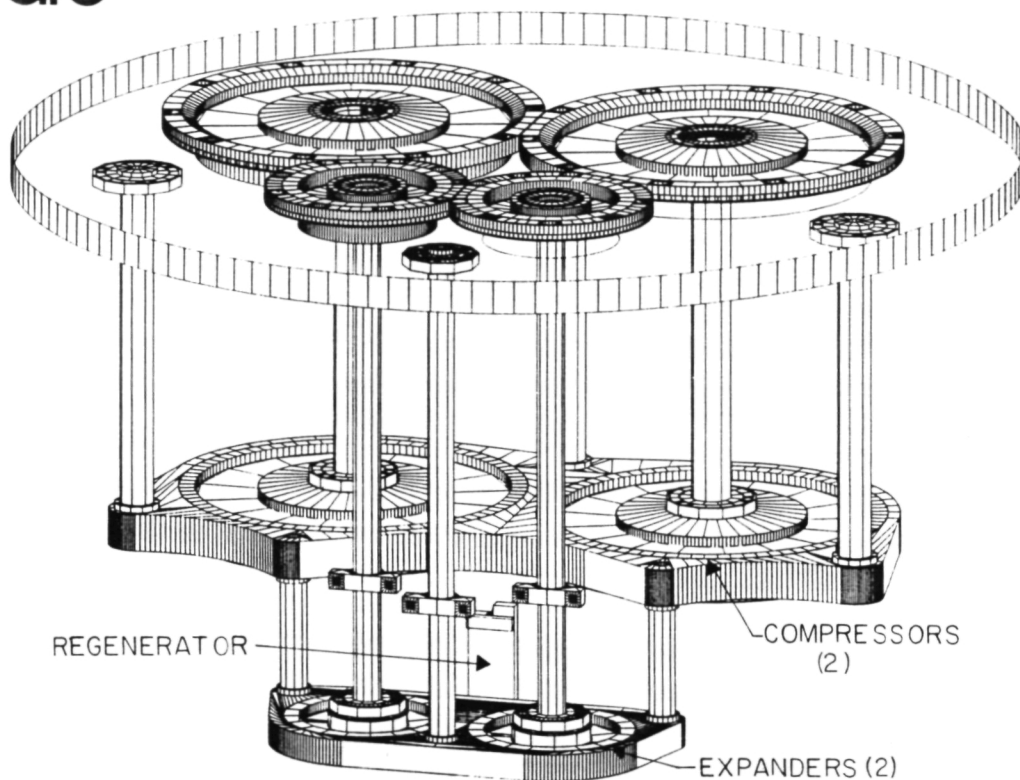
200 mW 4-20 K COOLER ASSEMBLY
